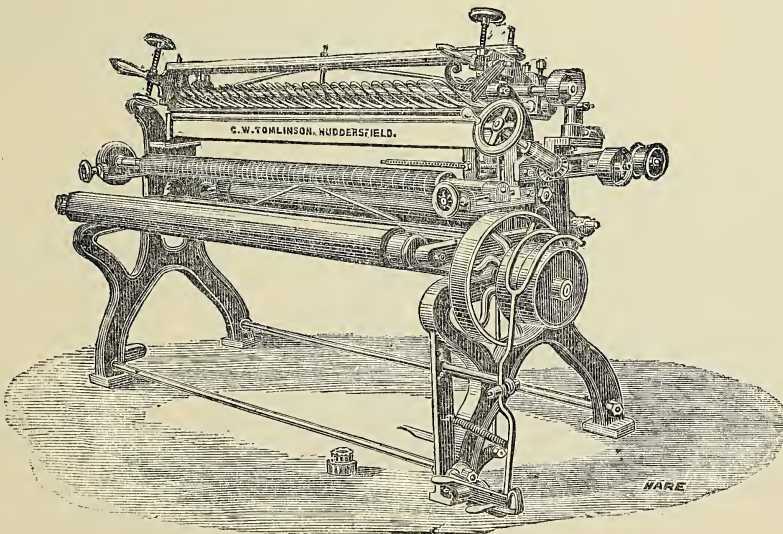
Broad Shearing-machine, with one extra Piling or Setting-up Roller. (66 inches wide.)
